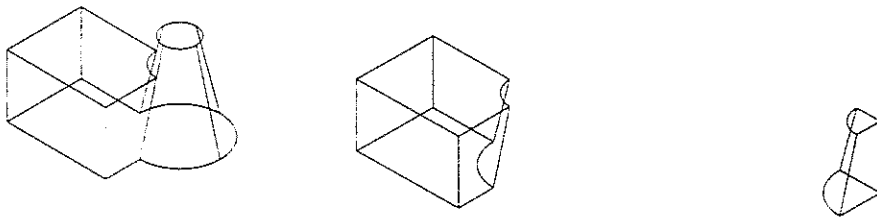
Combining two solid parts by joining, cutting, and intersecting
